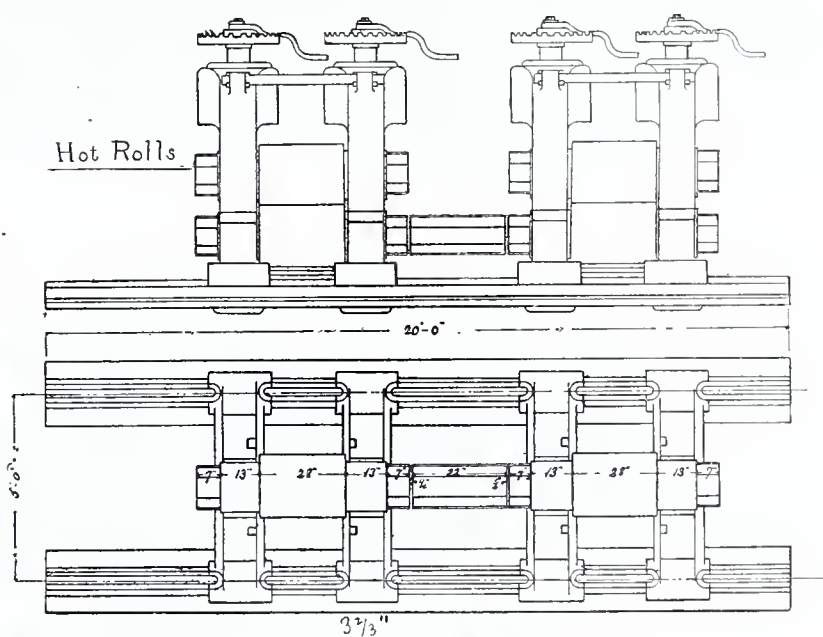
An American Tin Plate Mill. Elevation and Plan.
